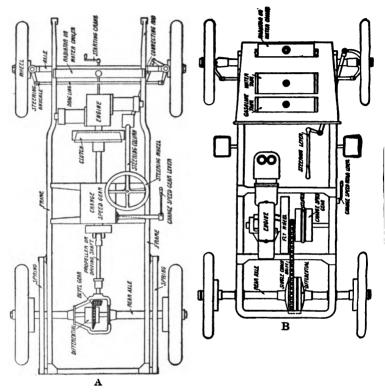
A, Propeller or Driving-shaft Drive; B, Single-chain Drive.
